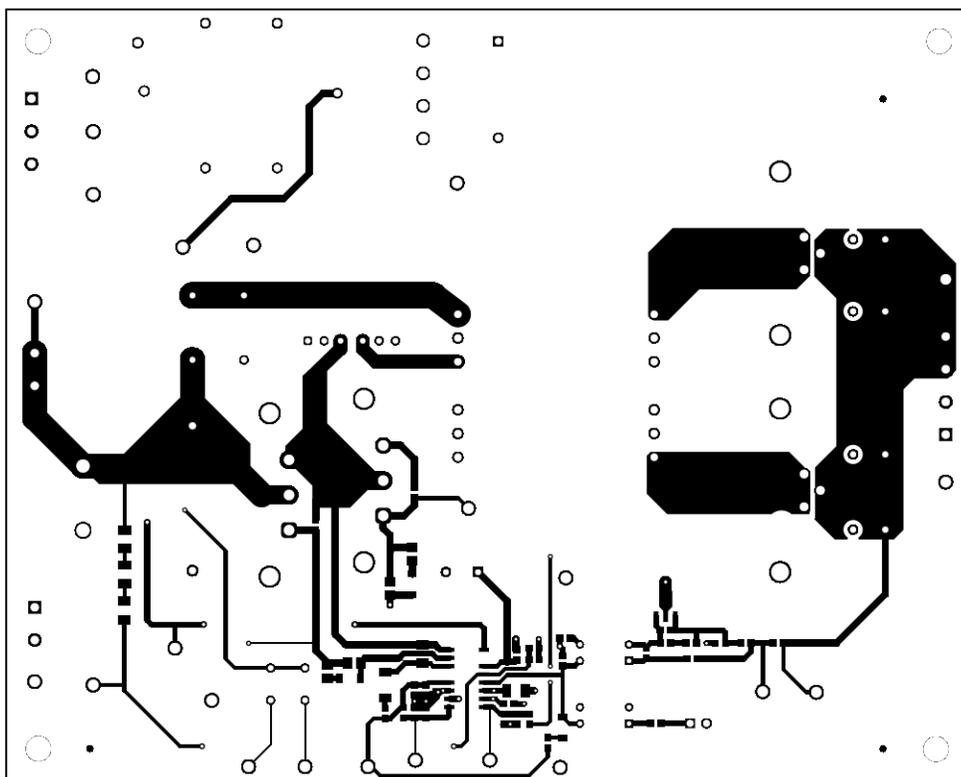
UCC25630-1EVM-291 Bottom Copper (Top View)
